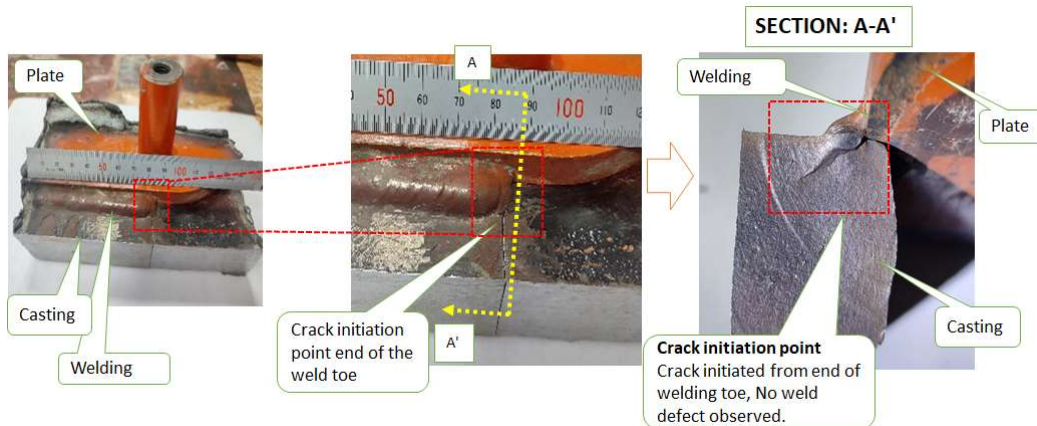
Observation of destructive testing. A: A small section of the failed part. B: Sectioning of the crack zone. C: Fracture surface investigation of crack zone section
